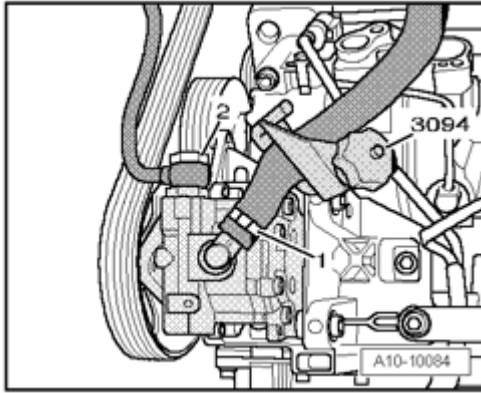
Identifying Hydraulic Hose, Hydraulic Pressure Line & Hose Clamps 3094
